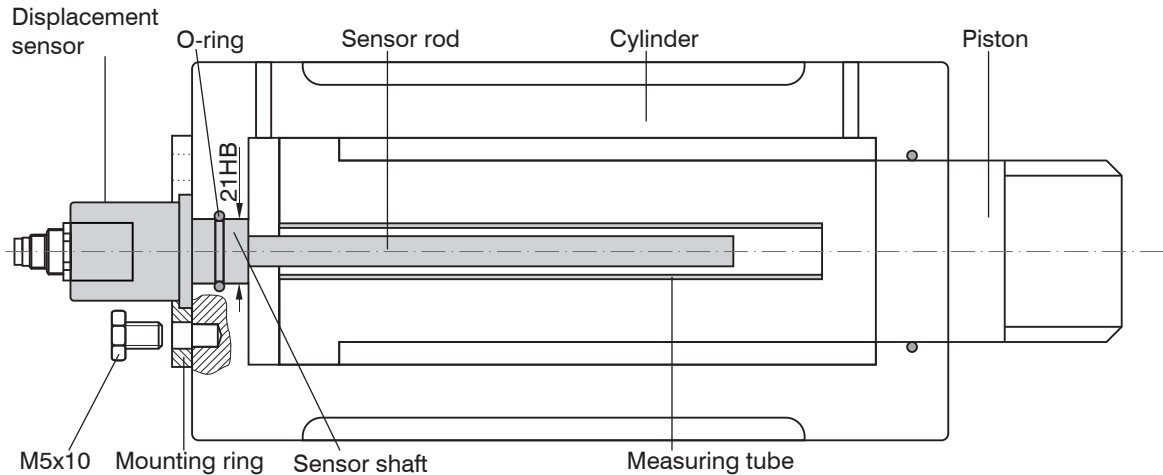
Sensor mounting in a hydraulic cylinder, EDS- ... -S model
